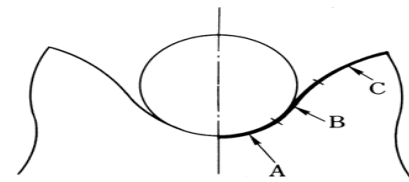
Sprocket Tooth Shape and Positions of Engagement
